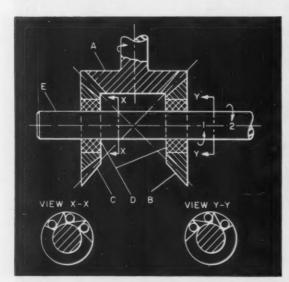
Two bevel gears mounted on roller clutches (D) provide unidirectional rotation for driven gear (A) regardless of rotational direction of drive-shaft (E).
